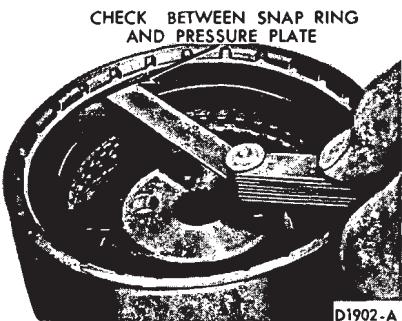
Checking Forward Clutch Snap Ring Clearance
